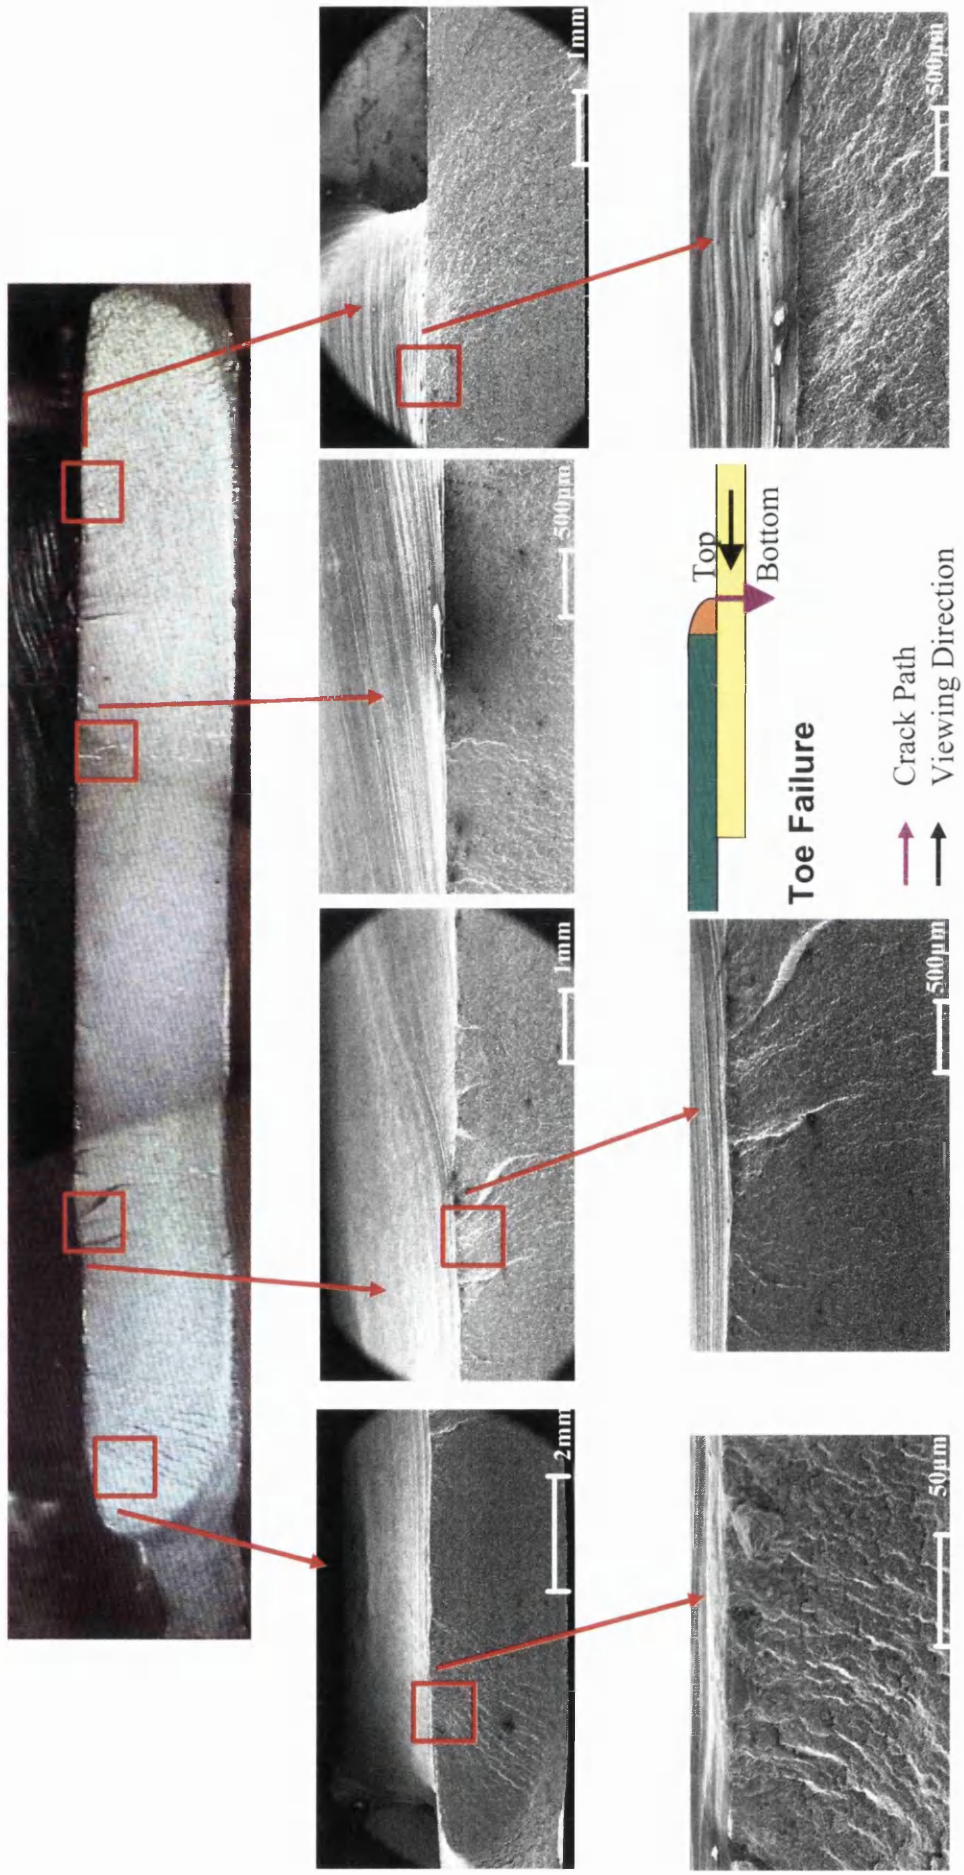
Typical Fracture Surface for GM11A Weld Toe Failure – Weld View
